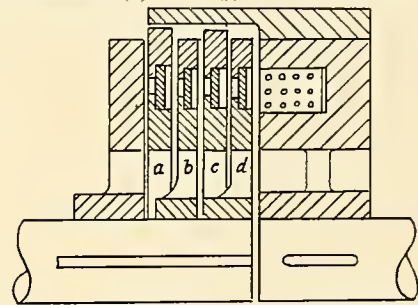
MAGNETIC CLUTCH WITH SEVERAL WORKING SURFACES.
